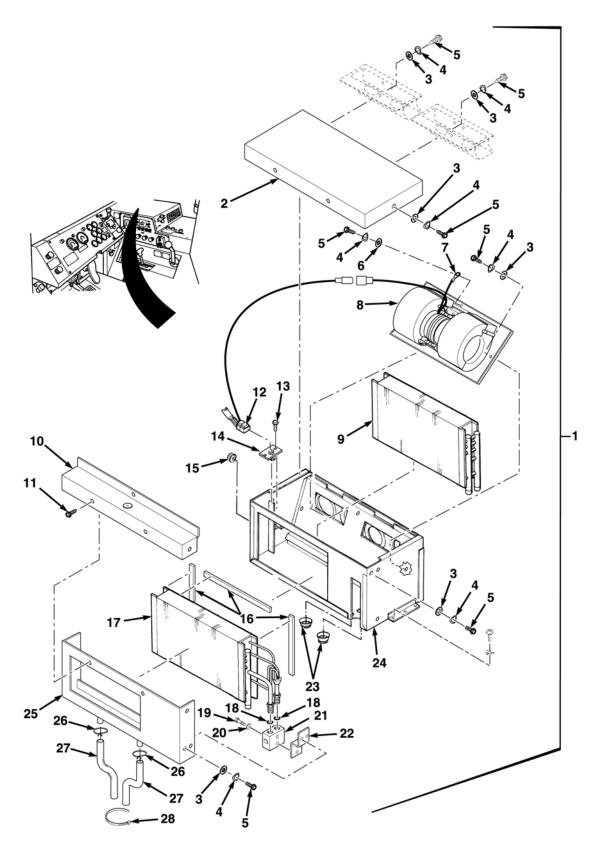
AC HEATER/EVAPORATOR ASSEMBLY
